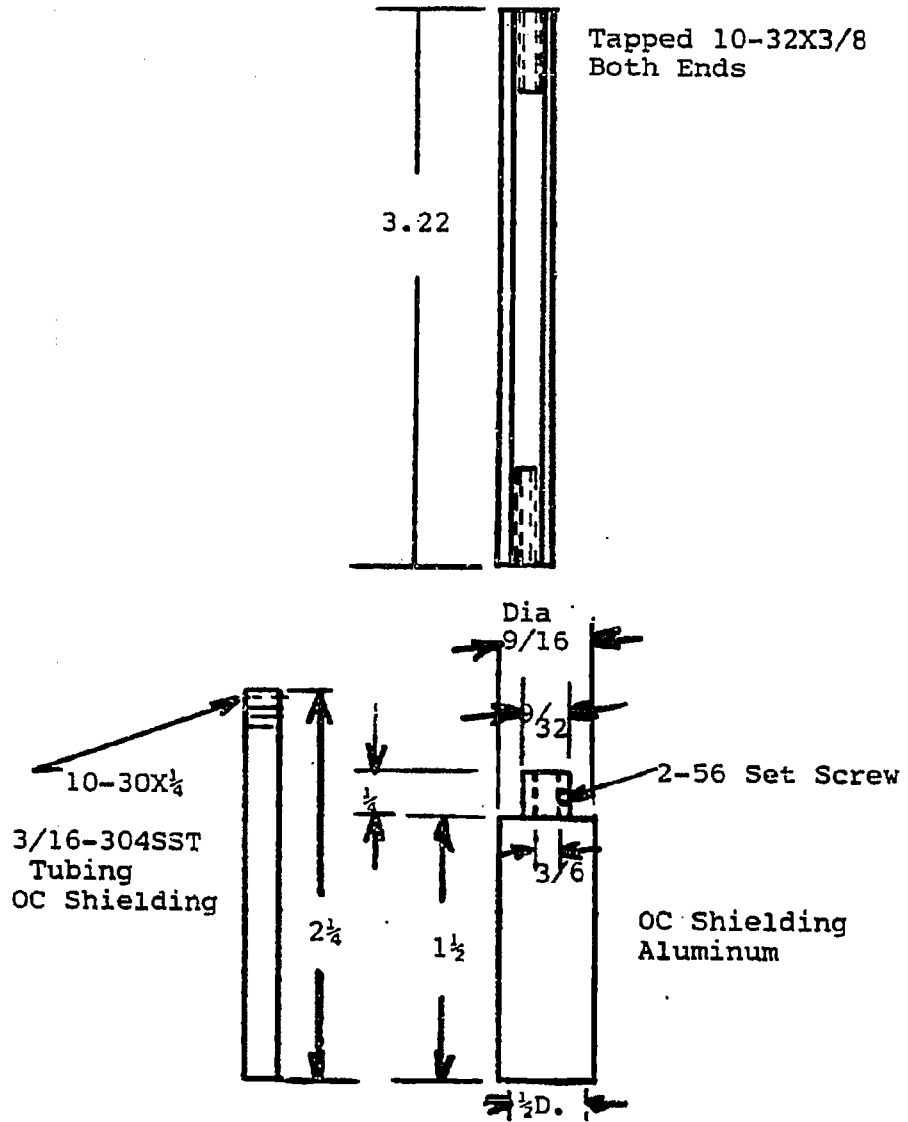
The bottom terminator support posts and outer cylinder aluminum shielding (see Photograph A.49).
